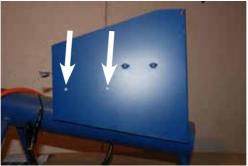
Rivets holding the control box in place. Two further rivets are on the other side of the chassis
